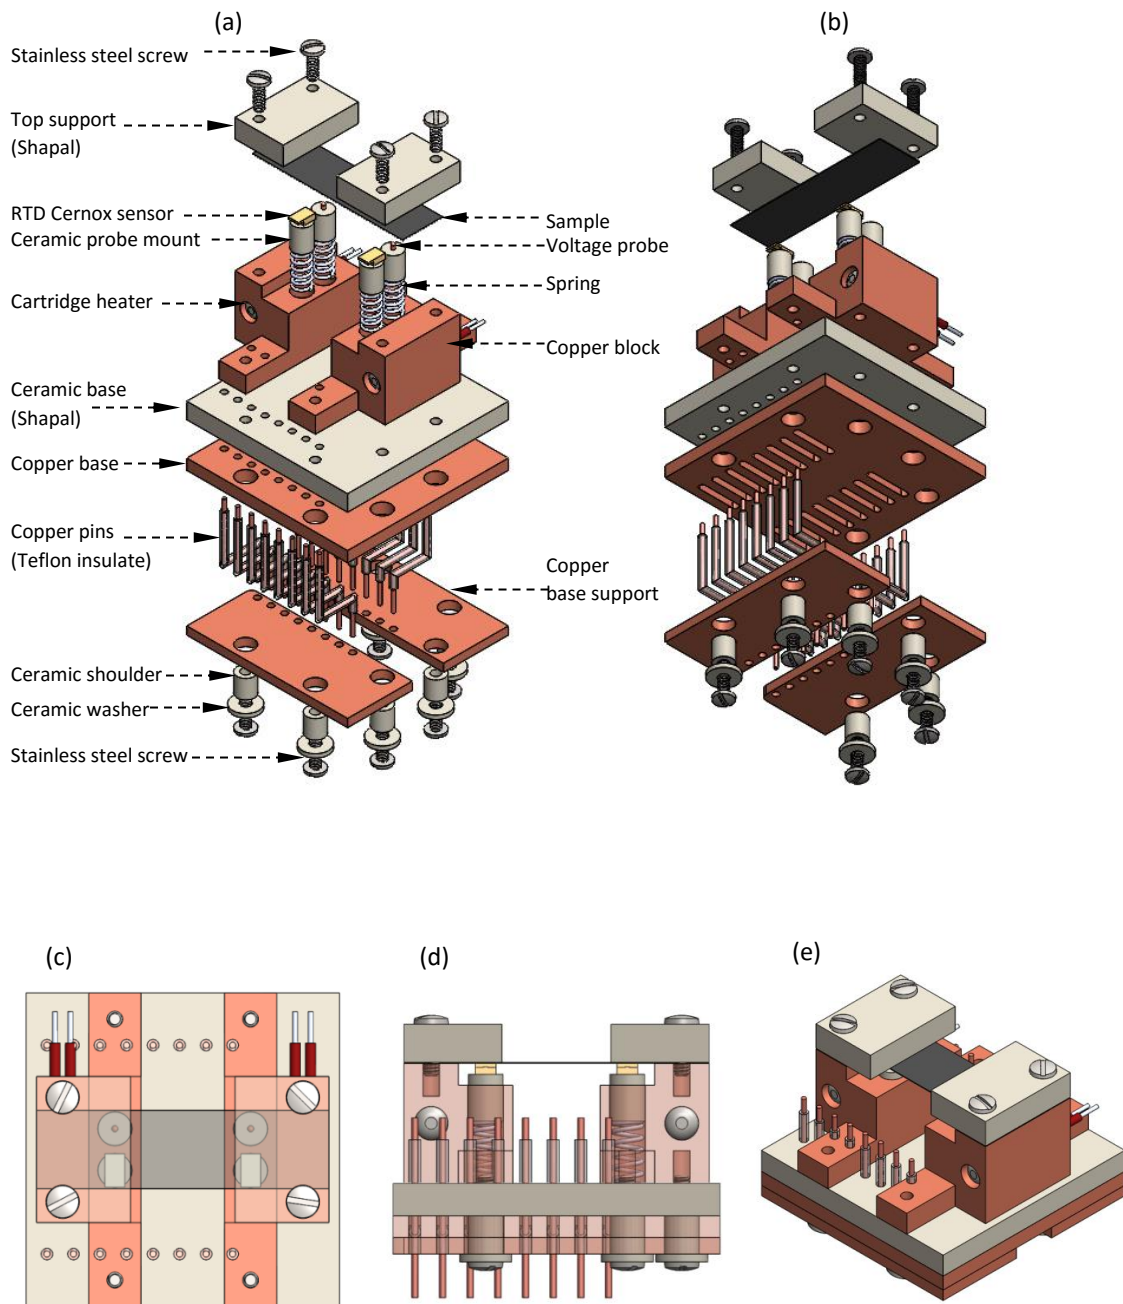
SolidWorks design of the sample holder: (a) and (b) dismantled device showing different components and arrangements; (c) top view; (d) front view; (e) sample holder after assembly.
